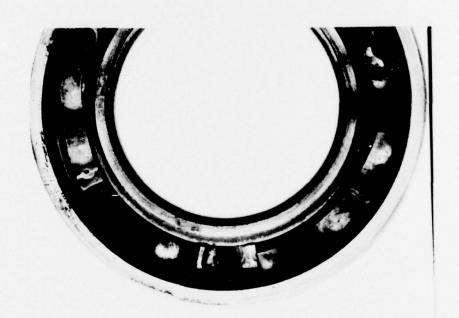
Bearing S/N TRL-22. Removed Position 3 With 29.4 Hours Time. 2x Enlarged View.
